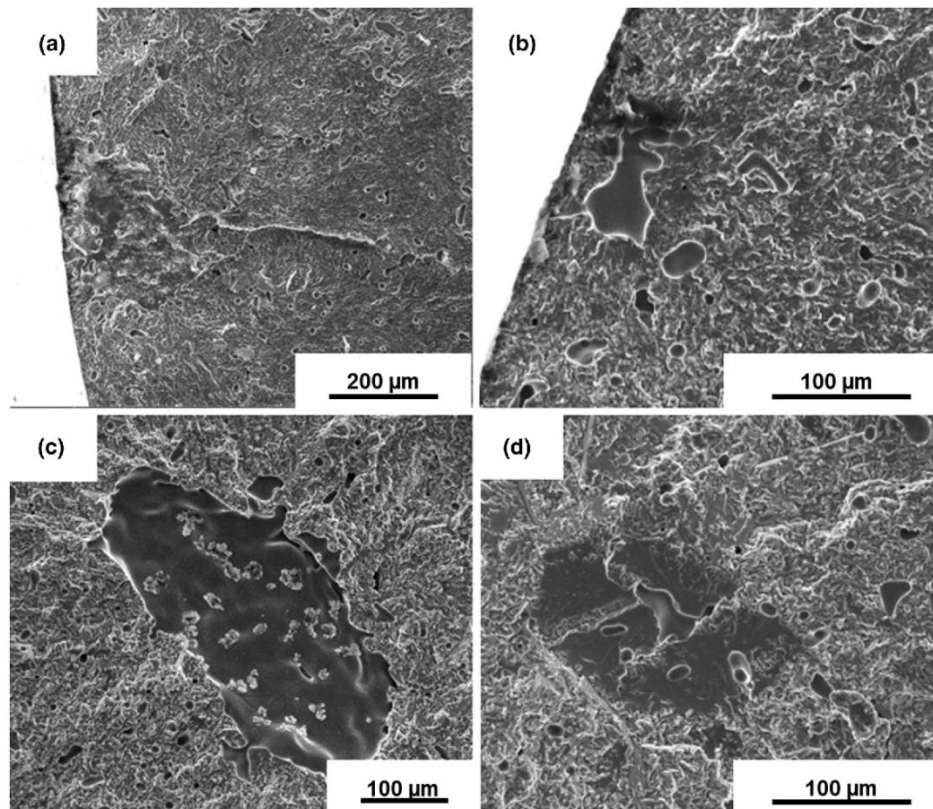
Fractography of fatigue fractures of  $-325$  HSPT samples. Fatigue cracks initiated from (a) extremely large pore on the surface ( $\sigma_{\max} = 450$  MPa,  $N_f = 72,666$  cycles), (b) pore cluster near surface ( $\sigma_{\max} = 520$  MPa,  $N_f = 171,492$  cycles), (c) extremely large pore under surface ( $\sigma_{\max} = 400$  MPa,  $N_f = 21,341,043$  cycles), and (d) facet with pore cluster ( $\sigma_{\max} = 450$  MPa,  $N_f = 16,764,731$  cycles).
